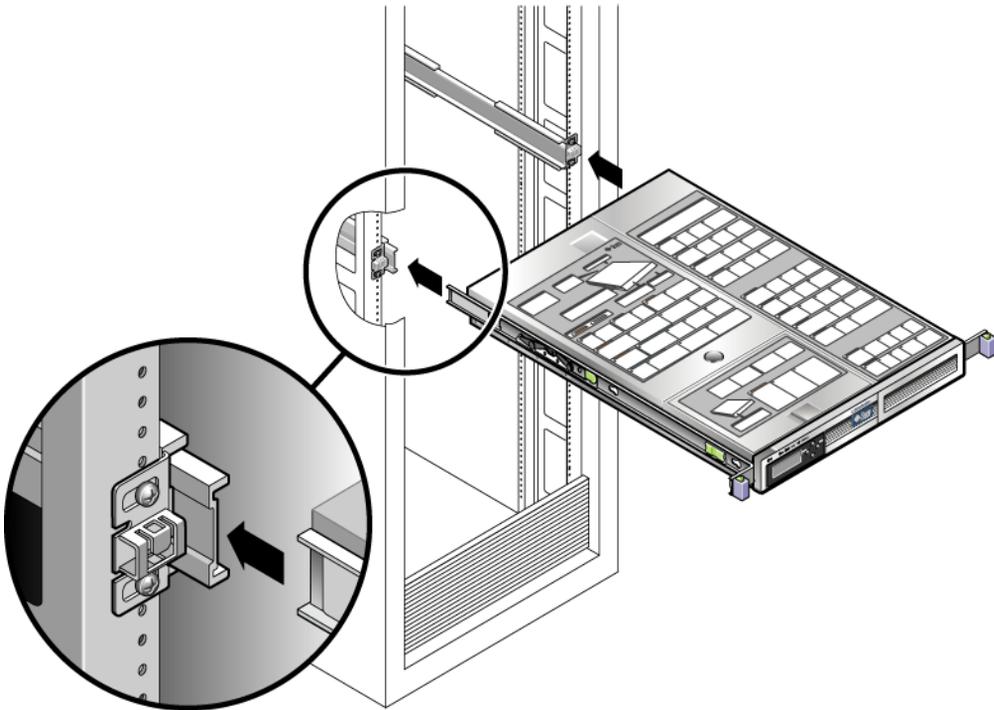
Mounting the Chassis on the Slide Rails
